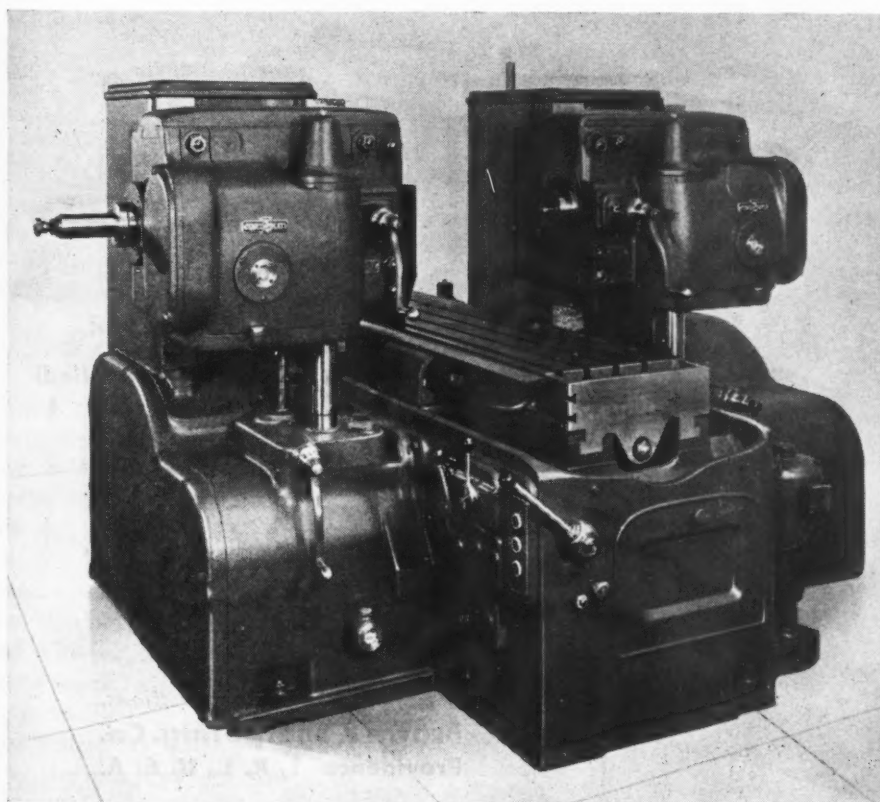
Cincinnati Duplex Hydromatic Milling Machine
